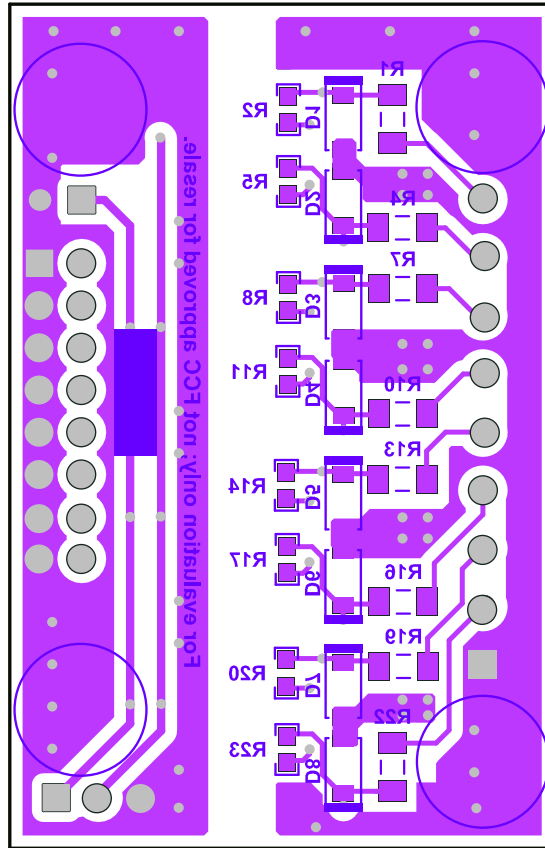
ISO1212EVM PCB Layout—Bottom Layer
